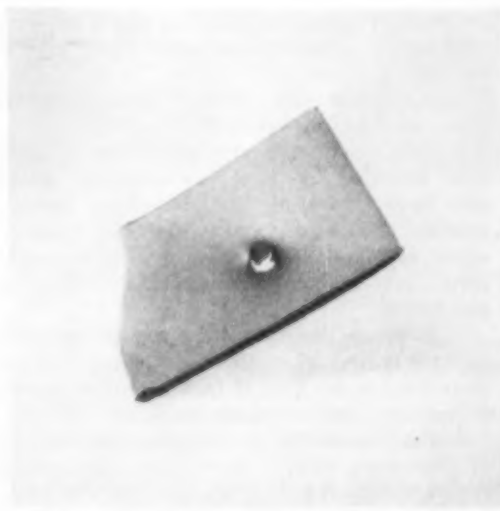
A punch driven through this chromium plated titanium sheet failed to chip or peel coating. It simply conformed to punch mark.
